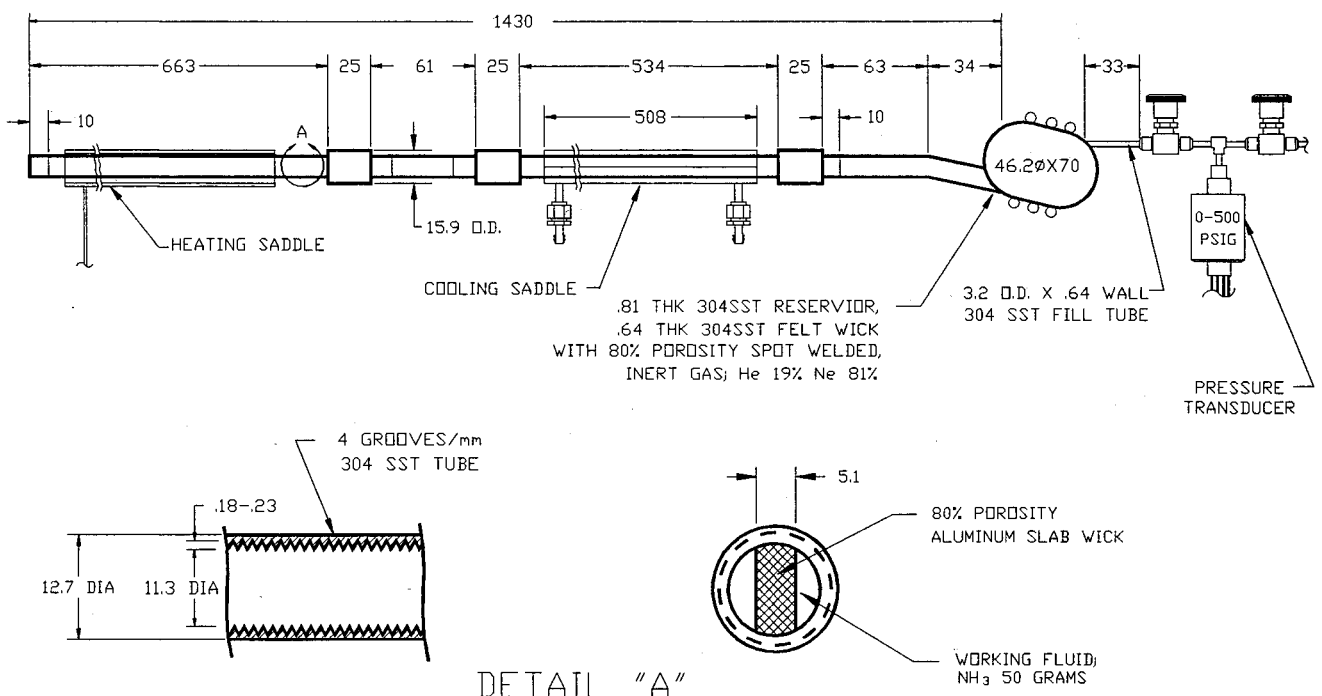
Test unit—ammonia variable conductance heat pipe assembly (note all dimensions are shown in millimeters).
